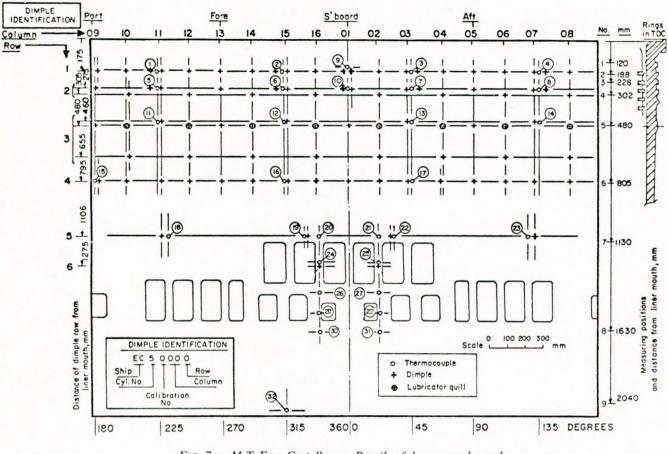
M.T. Esso Castellon — Details of thermocouples and dimples lay-out
